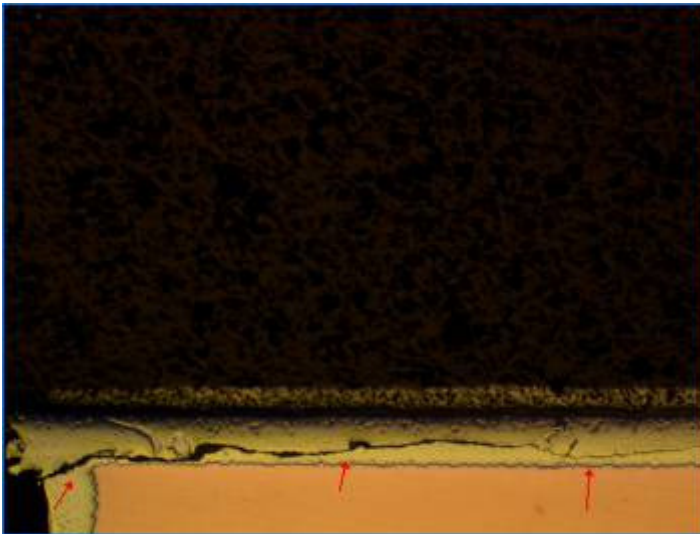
cross section, SN67, U52, right lead solder crack, 200xc
